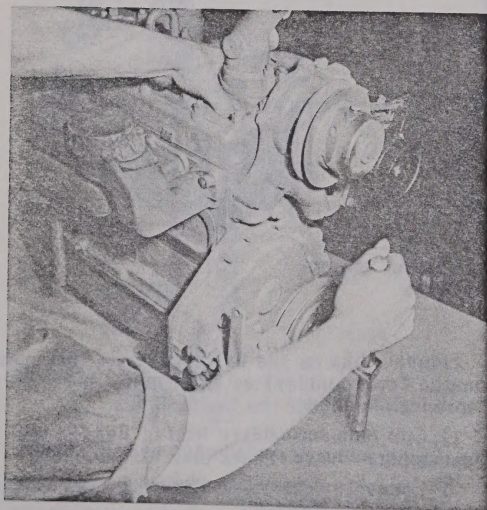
Checking No. 1 Cylinder on Compression Stroke
